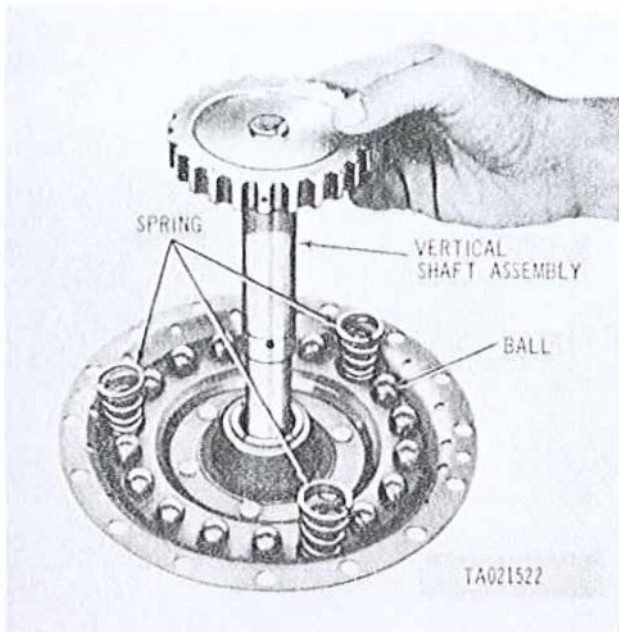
Removing or installing fan drive vertical drive shaft, balls, and springs from fan drive hub.
